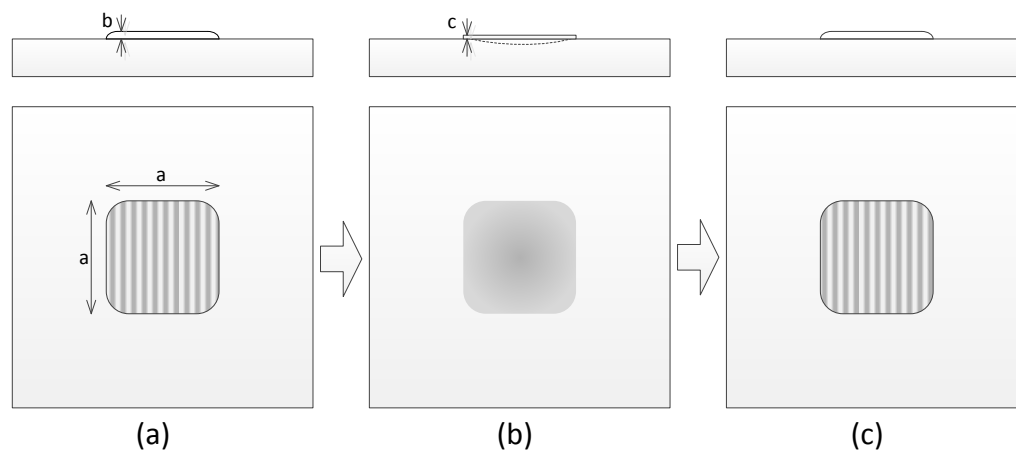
Steps of pad weld repair. (a) First pad weld (b) Pad weld ground-off and dished-out about 2 mm below the plate surface (c) Re-deposited pad weld.
